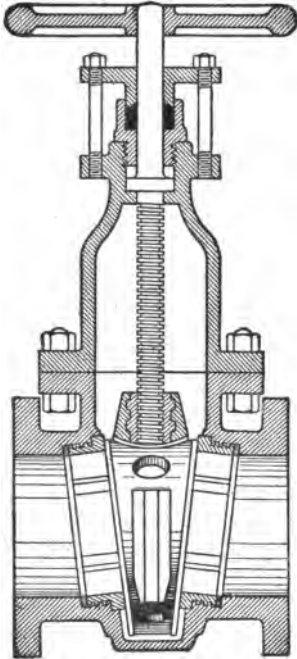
"Chapman" Gate Valve with Wedge-Shaped Sides.
